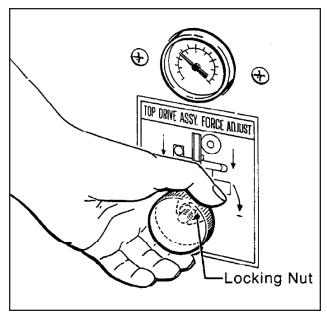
Air Regulator/Gauge, Top Drive Assembly
